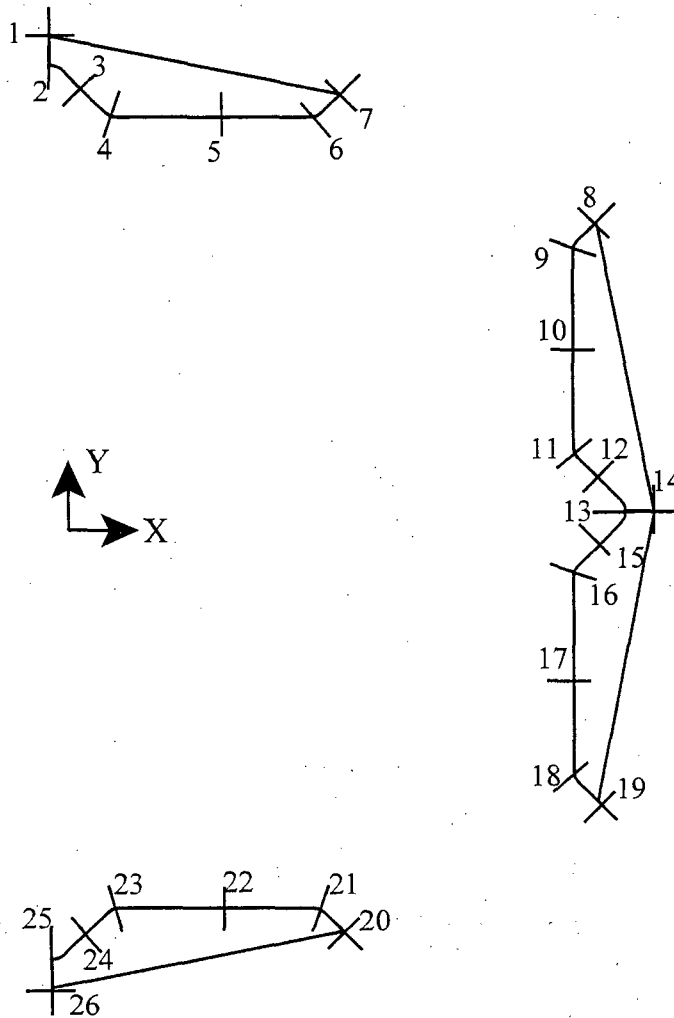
PWR Side Support Weldment Section Cuts – 0° Basket Orientation
